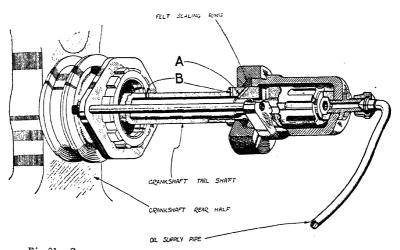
Showing feed attachment for crankshaft oil pressure test.
